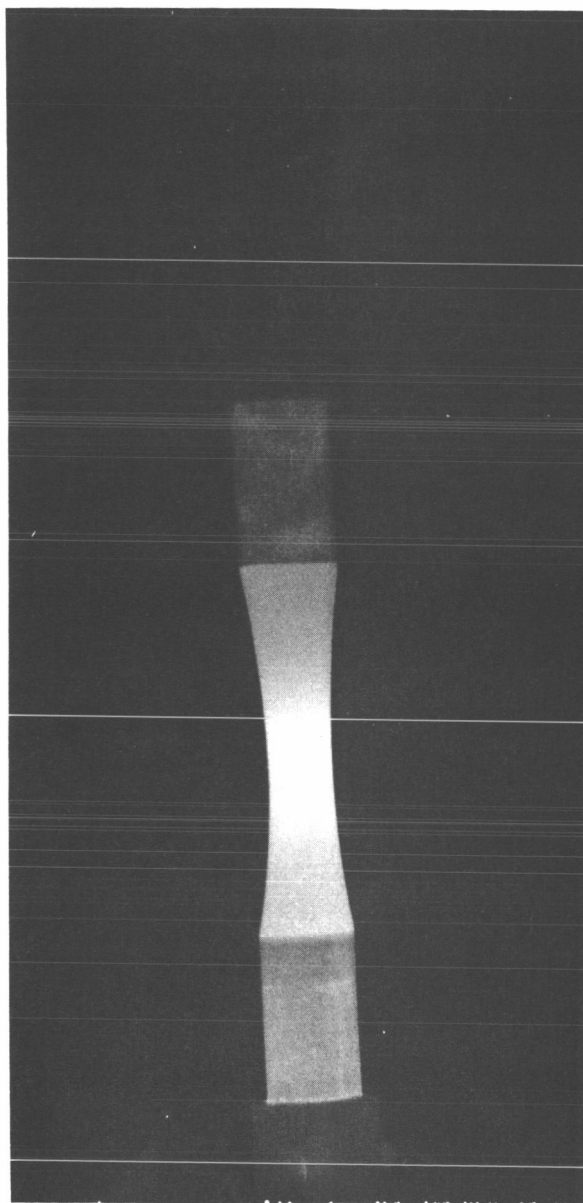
AISI-310 Stainless Steel Fatigue Specimen Coated With Calcium Titanate and Heated to 1500°F for Coating Separation Inspection
